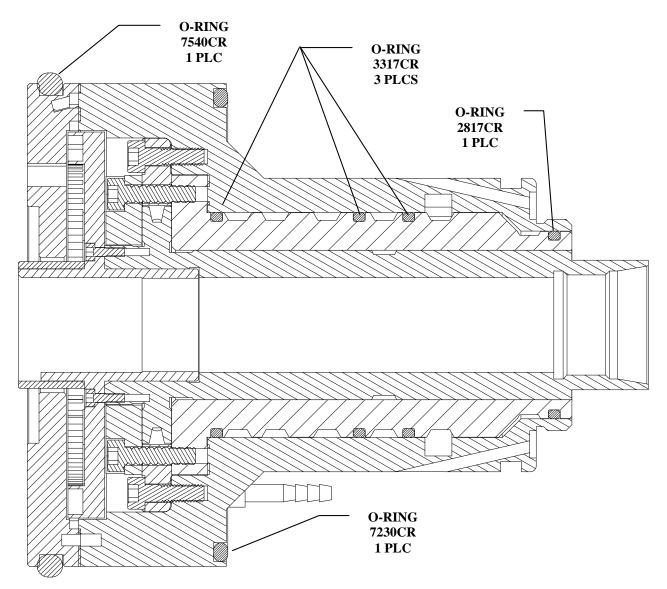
Cross-Sectional View of Air Bearing Motor Assy
